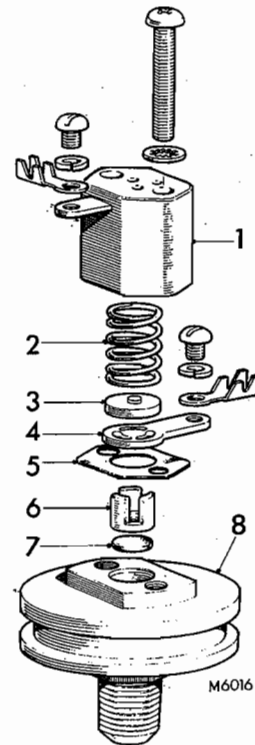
EXPLODED VIEW OF LOW PRESSURE SWITCH
